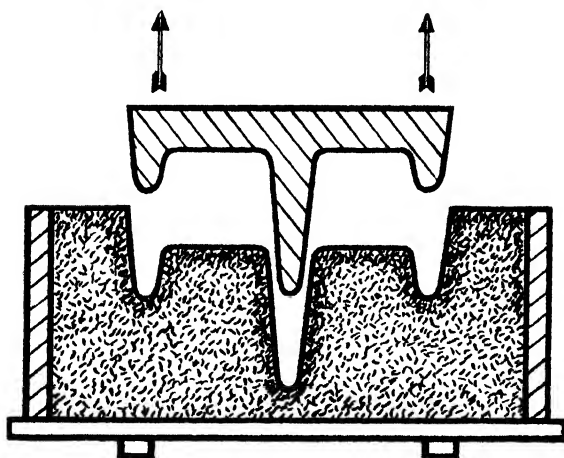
This pattern has ample draft; hence it strips easily from the mold.
